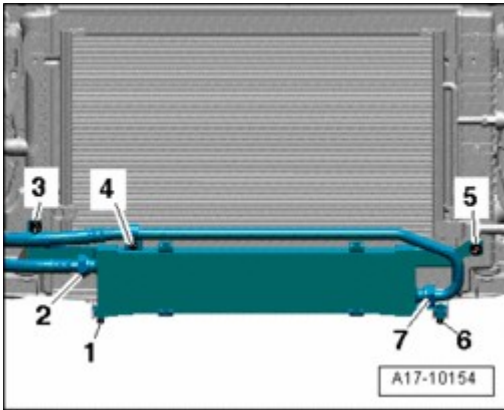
Placing Old Oil Collecting And Extracting Device V.A.G 1782 Under Oil Cooler
